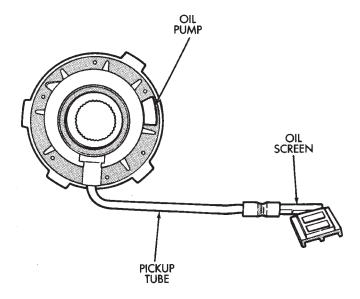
Removing Oil Pump, Pickup Tube And Screen
